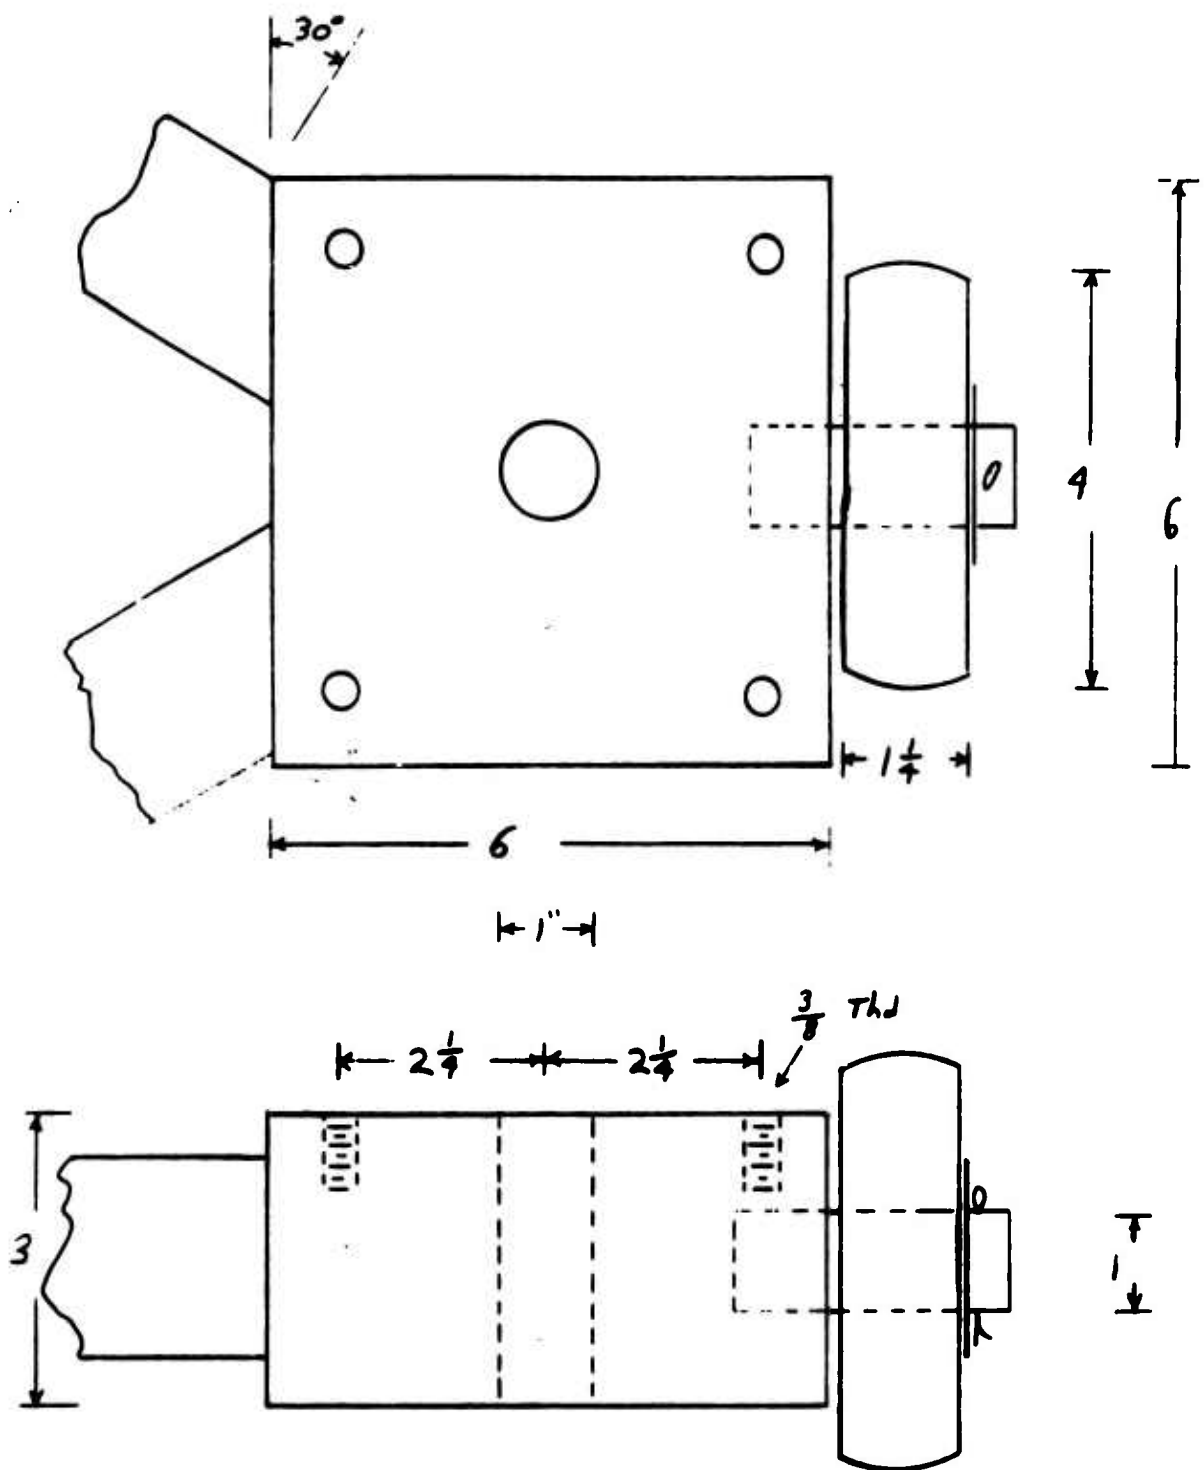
Ultrasonic Hub Positioner - Wheel Assembly
